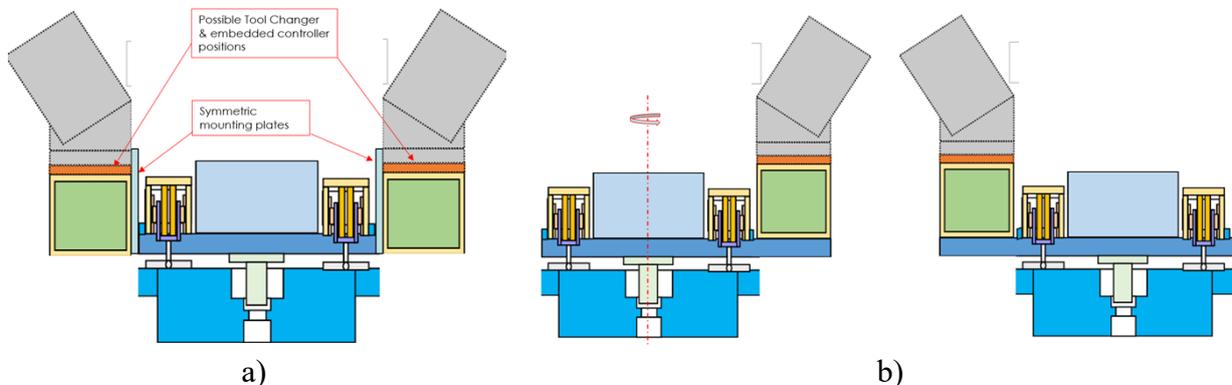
CBT design options to leave one side of the Tool Base free for the operator: a) Tool Changer can be mounted on both sides; b) CBT can be flipped
